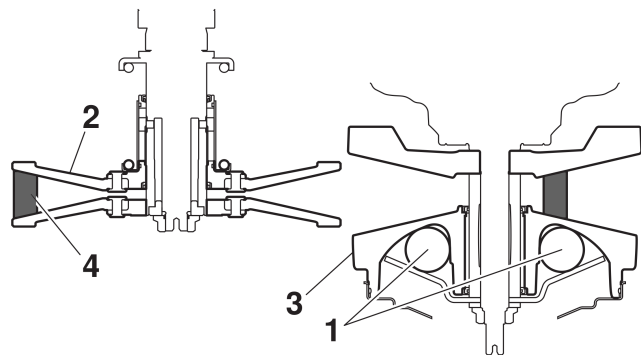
Top-down cross-sectional view of CVT assembly [10, p. 5-58]
